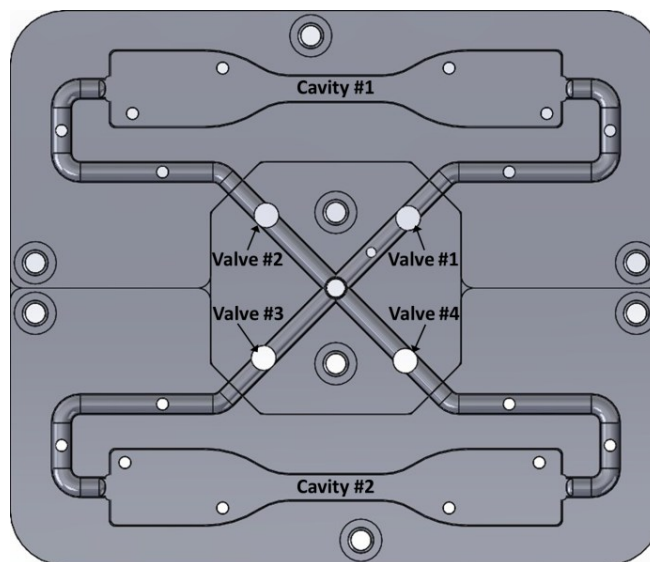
ASTM D638 – Type IV Mold Insert Used for Experiments
